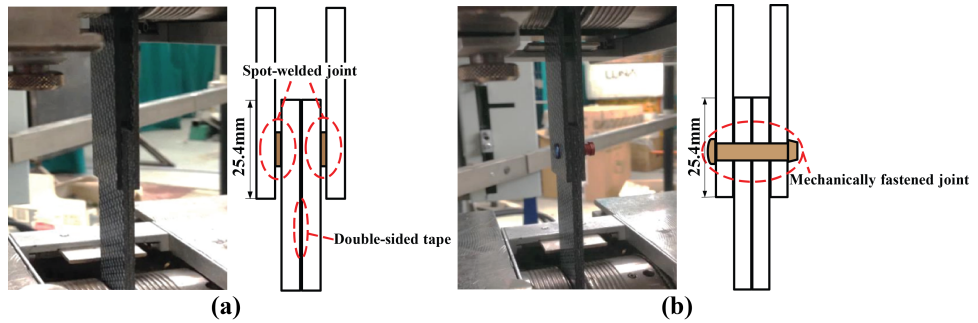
Loading fixture and specimen configurations for DLS tests: (a) spot welded specimen; (b) mechanically fastened specimen.
